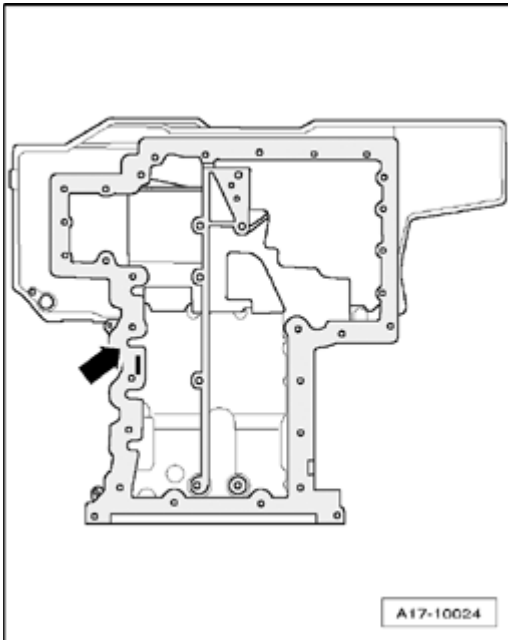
Applying Sealant Bead On Clean Sealing Surface Of Oil Pan Upper Part
